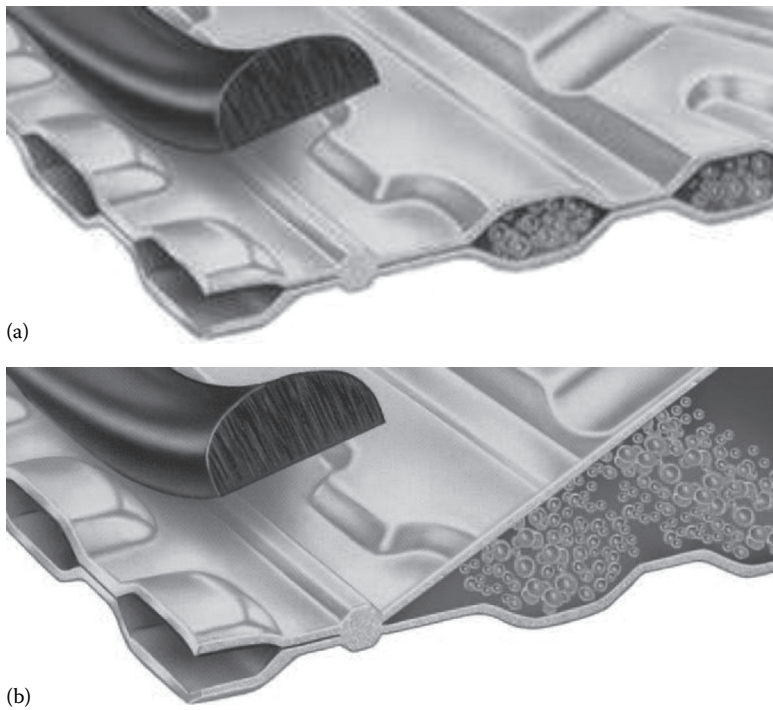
Semi-welded plateflow design: (a) light duty and (b) heavy duty. (Courtesy of ITT Standard, Cheektowaga, NY.)
